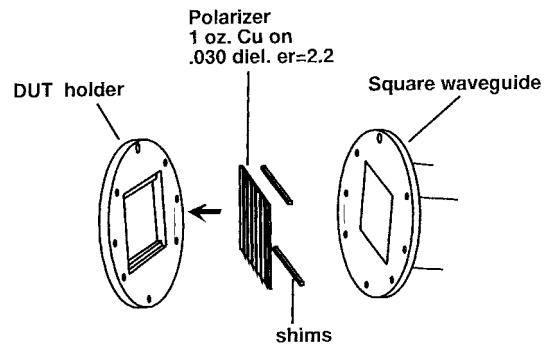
DUT holder and sample polarizer for measurement fixture.
